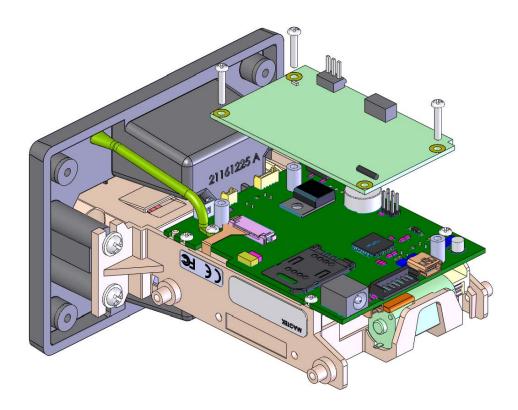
Installing Contactless Module on Contactless Ready Model
